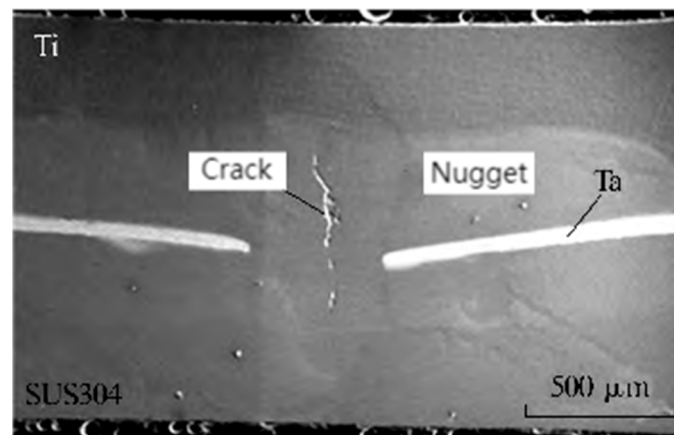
Morphology of Ti/Ta/SUS304 spot welding joint—Reprinted from Ref. [62]. 2016 Welding Machine.
